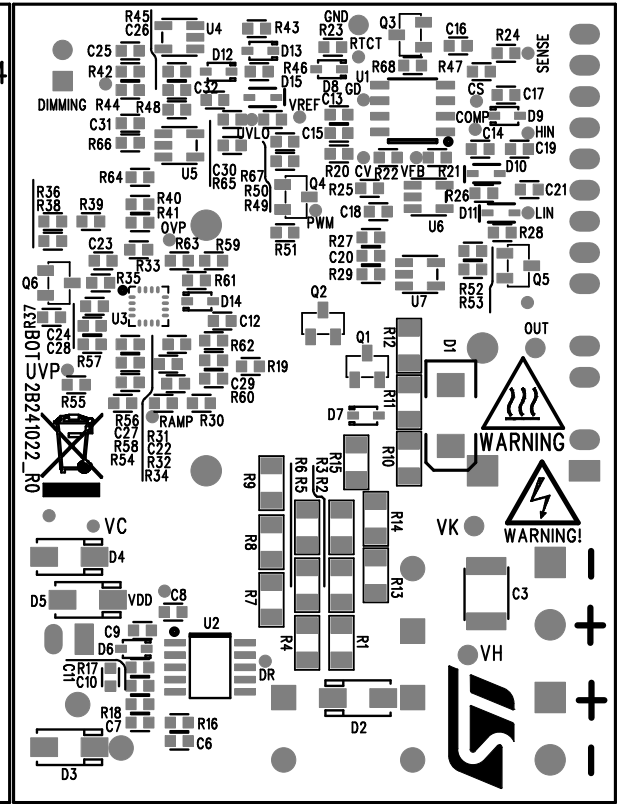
Daughterboard PCB layout - 4 Layer FR4 (top side)
